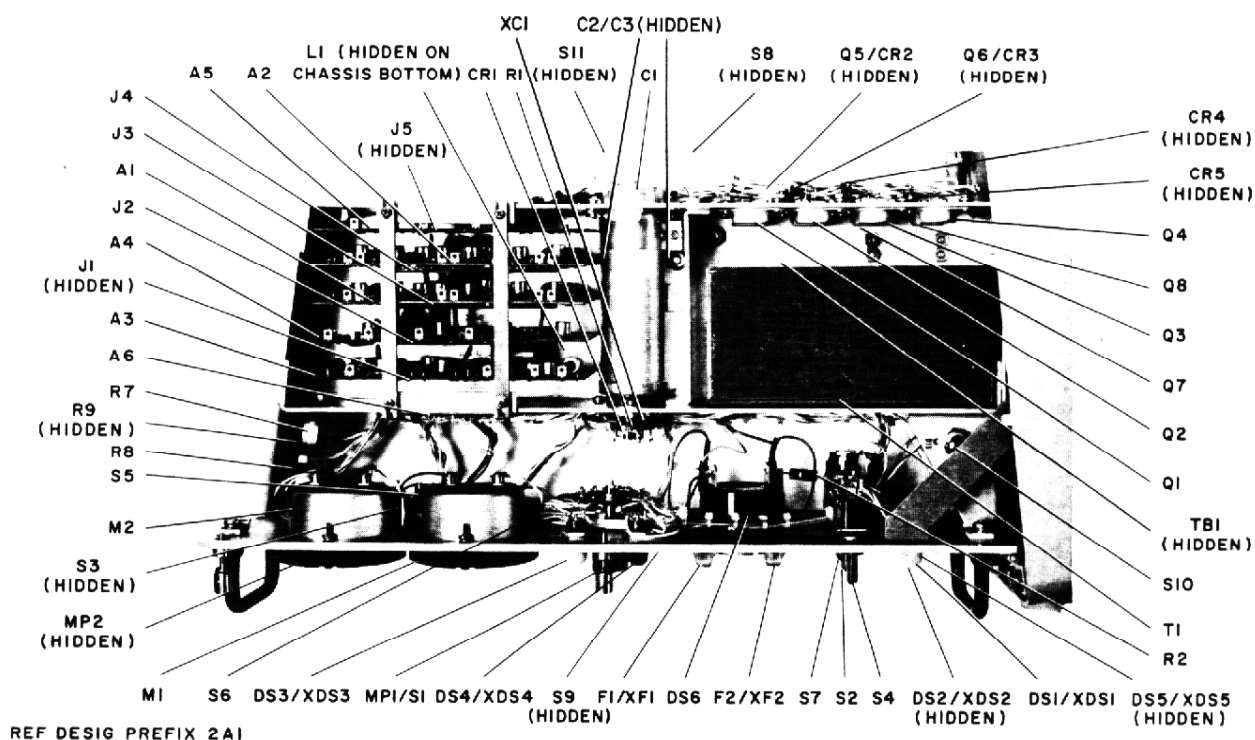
RF-601A/C Antenna Coupler Control Chassis Panel Assembly, Component Locations
